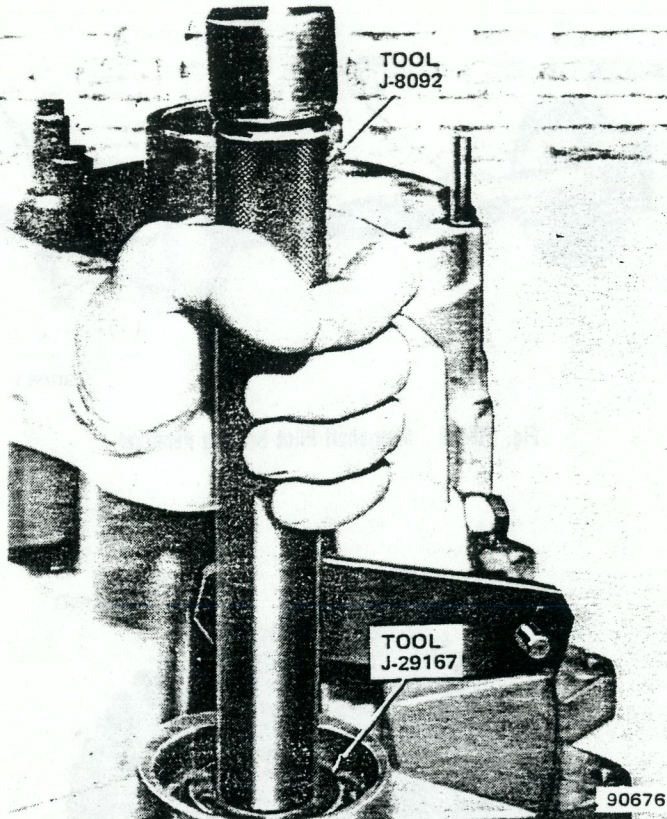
D-28 Front Output Shaft Front Bearing Installation
